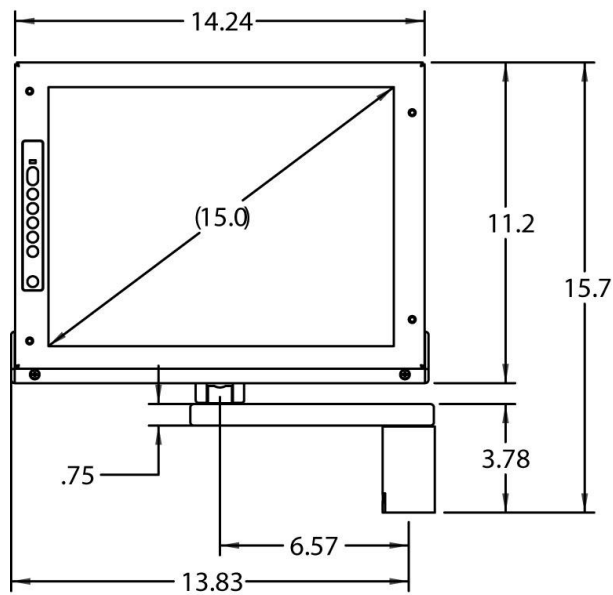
1500 Center-mount Arm outline dimensions (inches)
